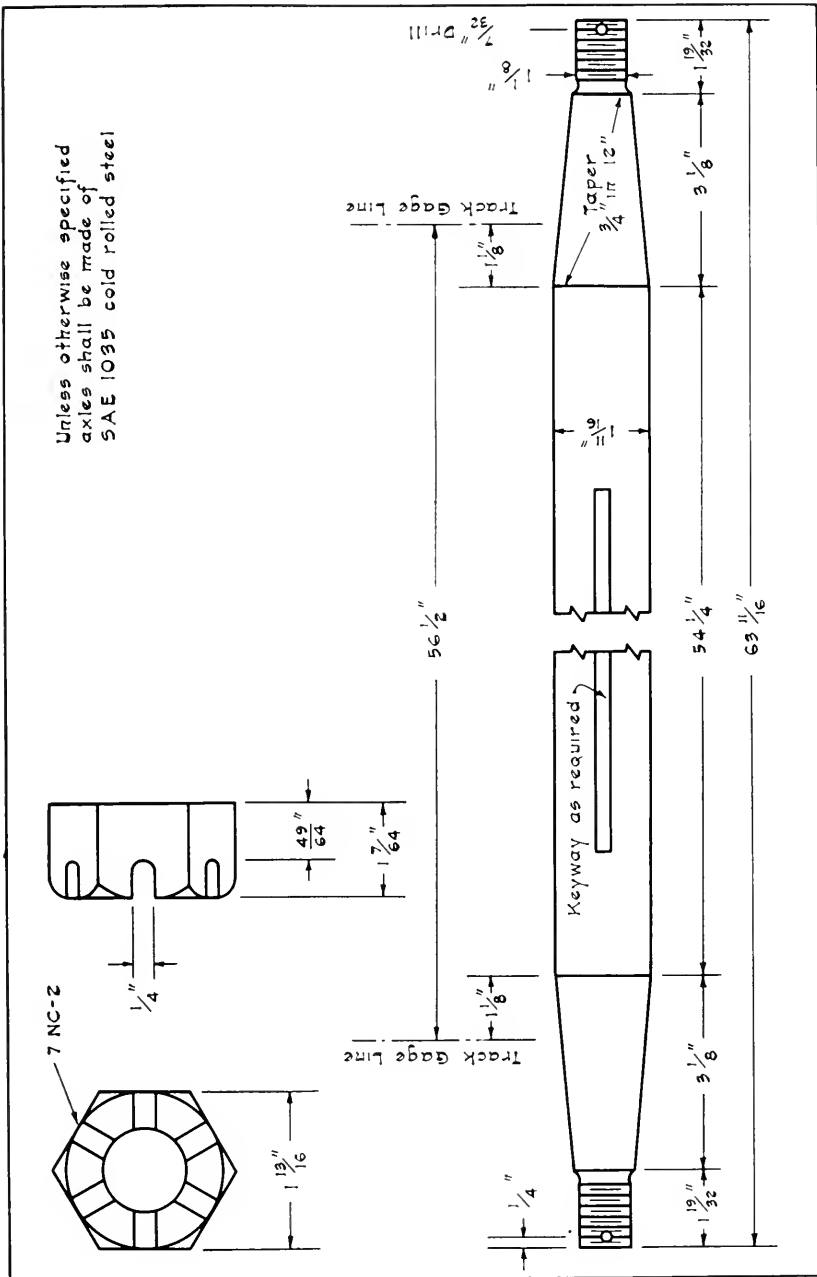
AREA 1 11/16-in motor car axle and end nuts.
